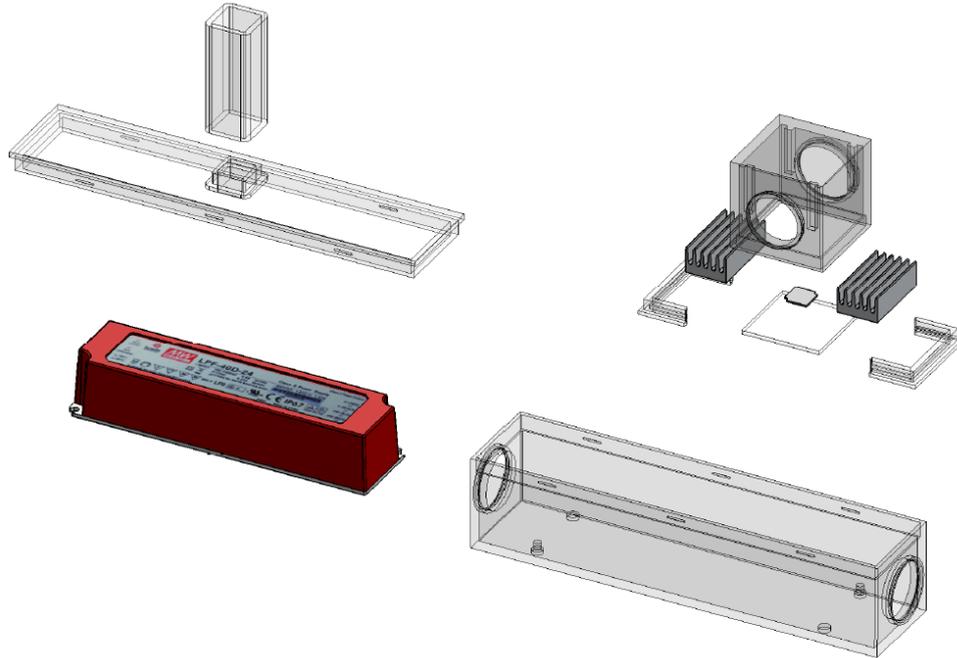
Exploded view of the complete lighting product - Iteration 3.
